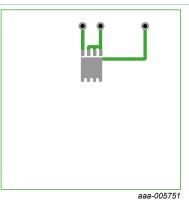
PCB layout for thermal resistance junction to ambient minimum footprint; FR4 Board; 2oz copper
